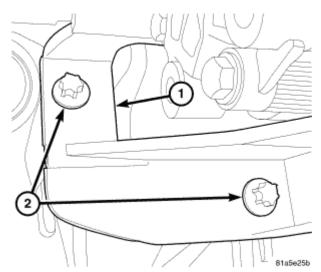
Identifying Rear Power Steering Pump Mounting Bracket Bolts Courtesy of CHRYSLER LLC
